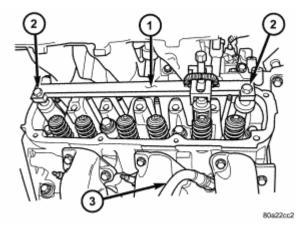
Spark Plug Adapter Tool Courtesy of CHRYSLER LLC
